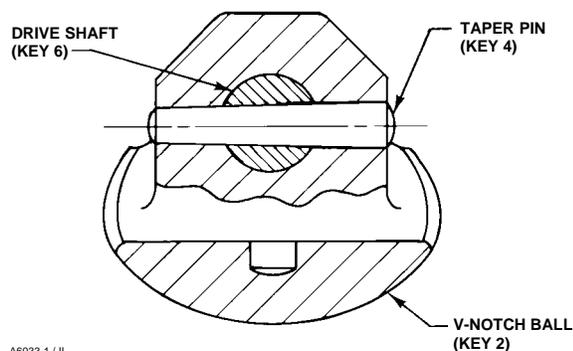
Taper Pin Installation for Design V150, V200, and V300 Sizes 1, 1-1/2, & 2-Inch Valves.
